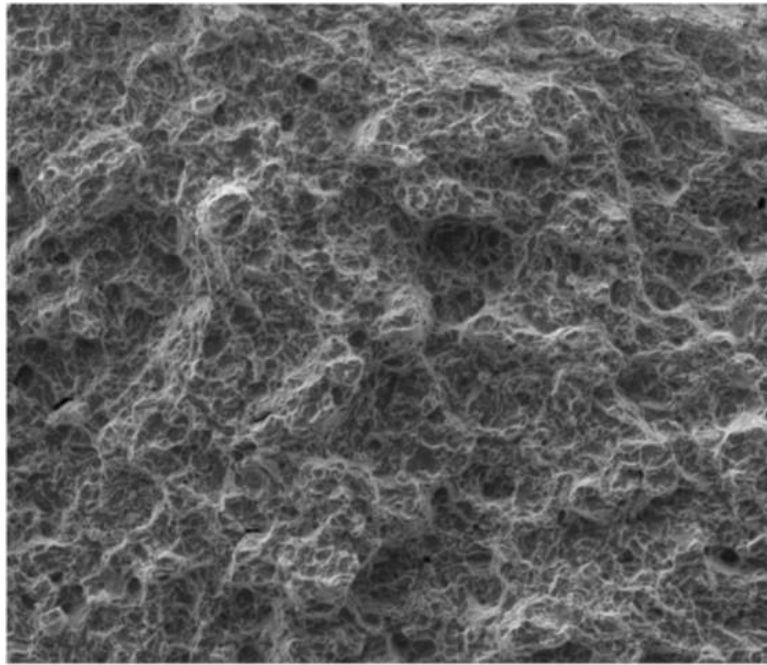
4340 Cd - 1 hr Bake Ductile Fracture
